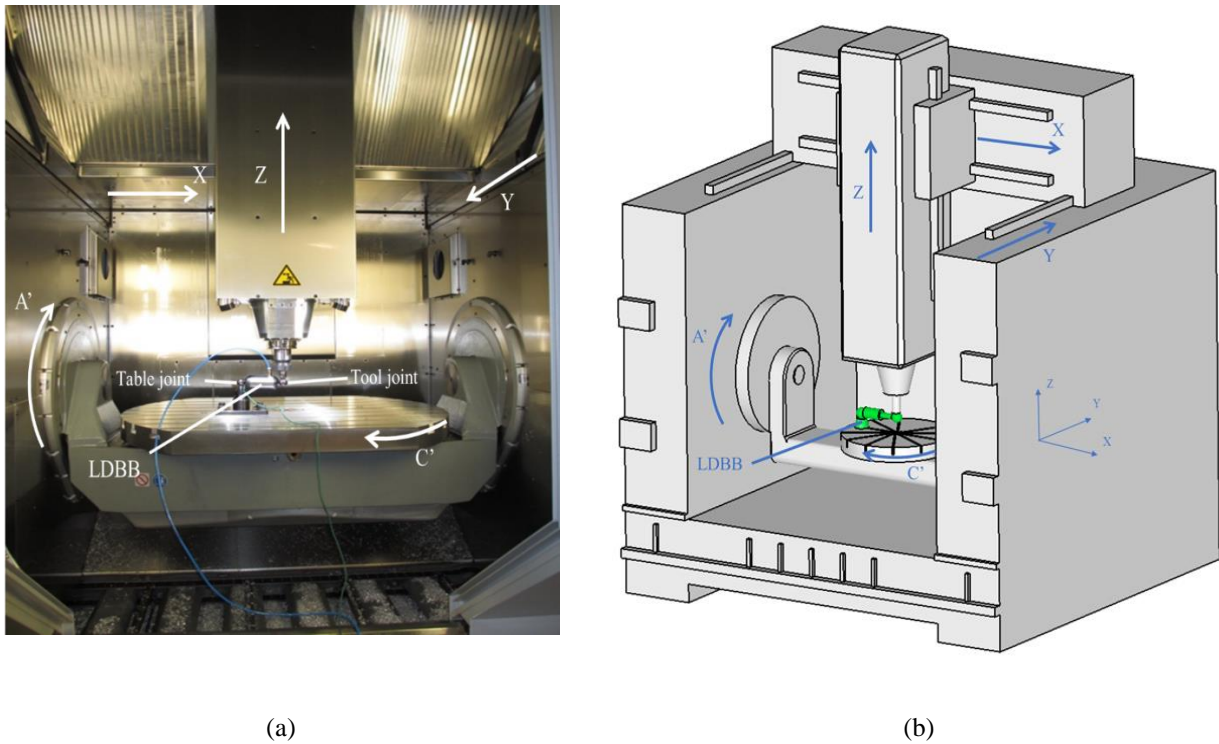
a) Five-axis CNC machining center with loaded telescopic double ball-bar mounted between the table and spindle balls. Only axes X and Y are used for the tests. b) CAD model of the laboratory 5-axis CNC machining center including loaded telescopic double ball-bar device (the CAD model differs from the real machine and is only shown to illustrate the overall machine geometry)
